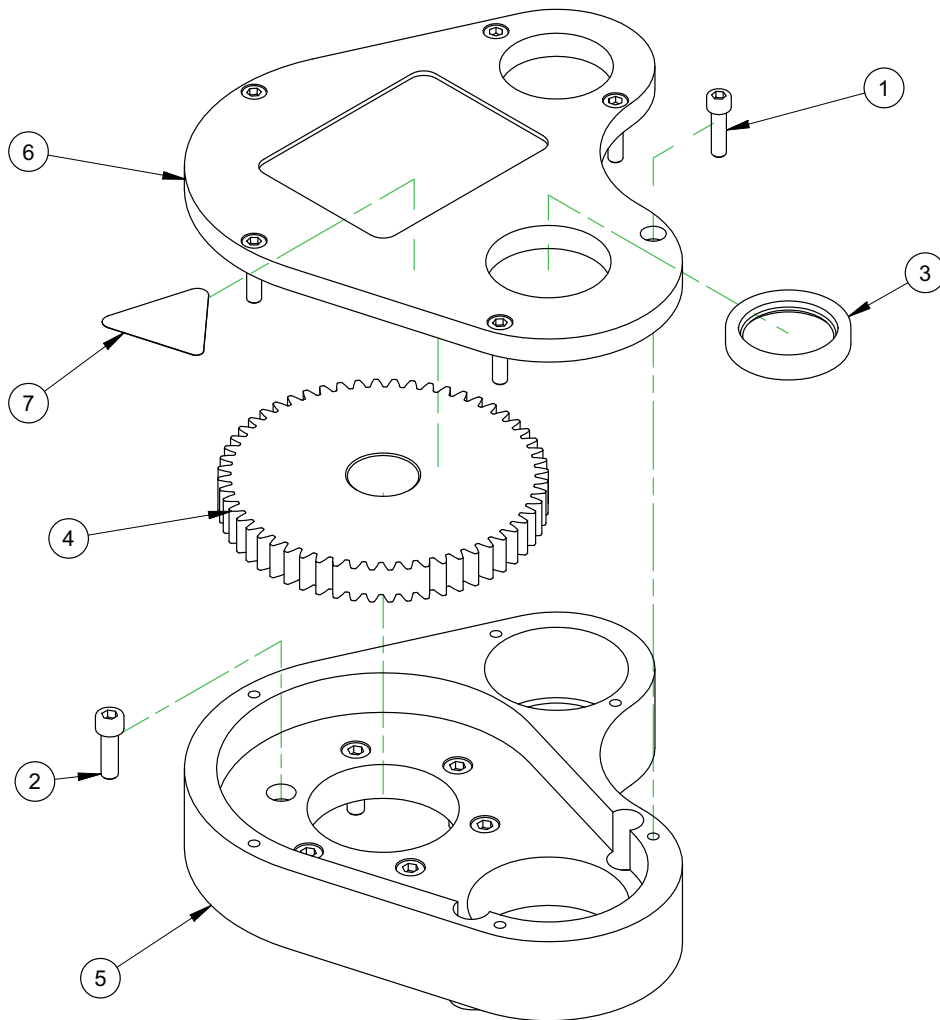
TOP SLIDE ASSEMBLY (P/N 75077)
